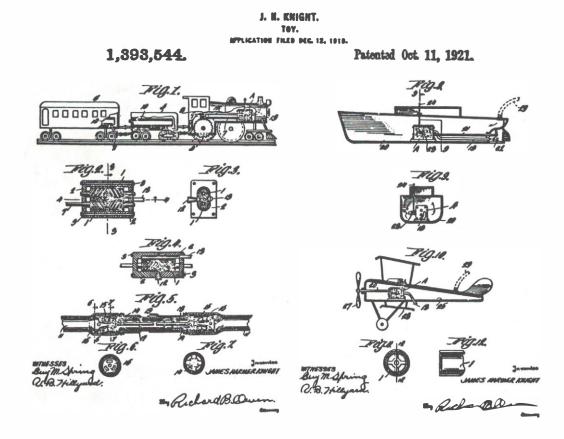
shows a connection for two compressed air tubes. Figure 1 shows a three-unit train wherein the tender and coach contain compressed air tanks and the engine contains the motor geared to the drive wheels. The spent air exhausts through the smokestack. Mr. Knight also adapted the invention to a boat and then to an airplane. In this toy, he directed the exhaust pipe downward and backward to aid in the "lift" of the airship.
